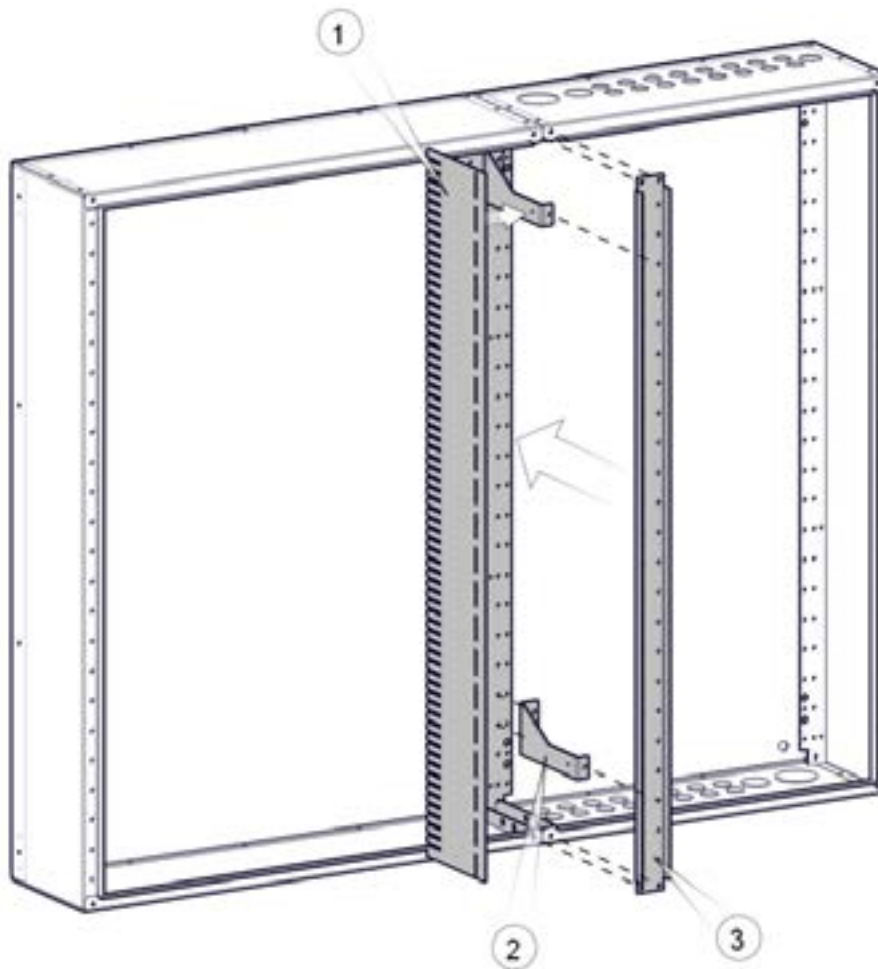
Mounting of end supports to back profiles. The end plates are fastened to the side and back plates using screws.
